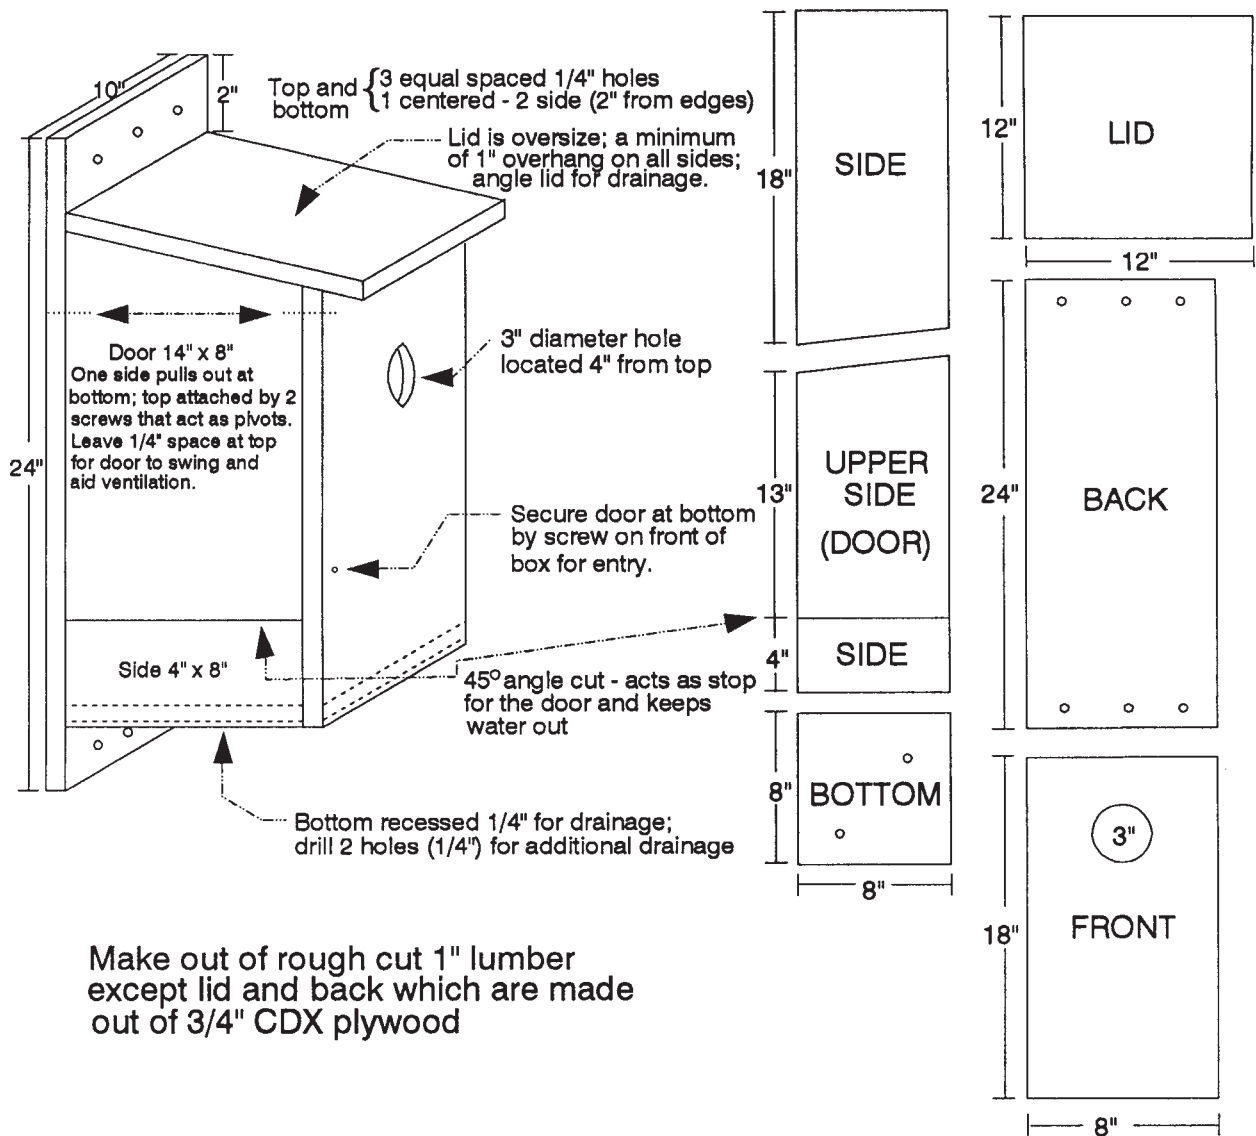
American kestrel nesting box construction plan with dimensions and description of door mechanism. Entrance should face south to southeast, away from prevailing winds and storms. Boxes can be attached to trees, poles, or posts. Optimum height of boxes is a minimum of 10 ft (3 m), but lower attachments can sometimes be successfully used if taller ones are not available.
